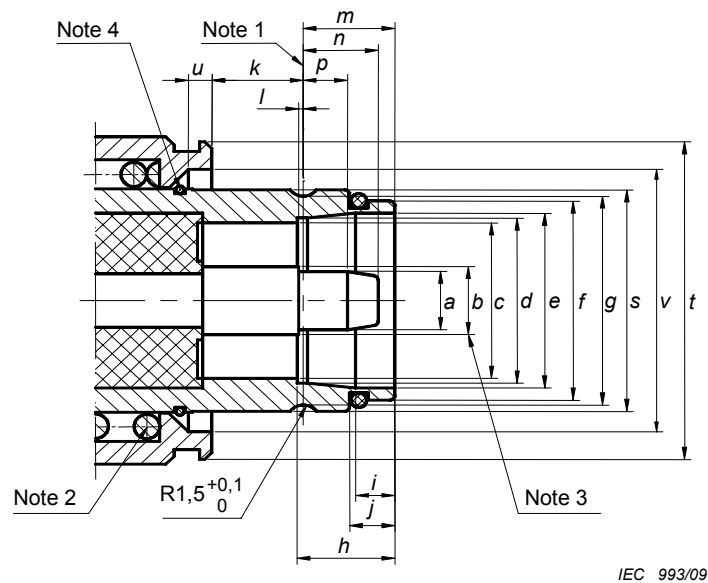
Connector with pin-centre contact (for dimensions, see Table 1)
